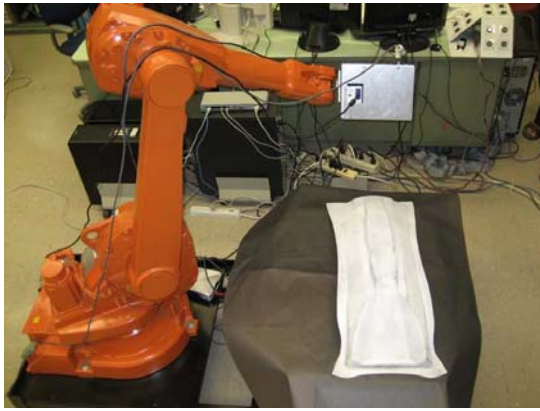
Robot-aided Automatic 3D Rapid Surface Inspection System
